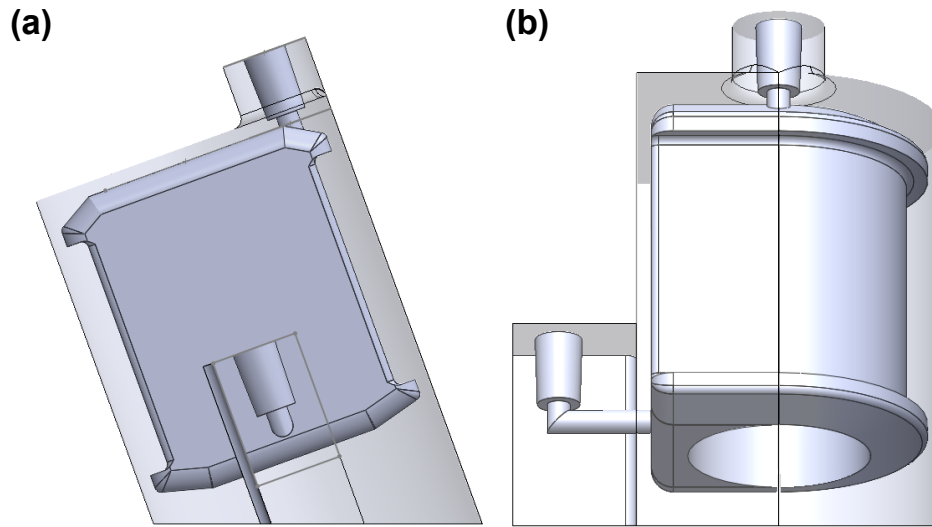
Resilient mount mold: (a) front view of the mold and (b) side view of the mold.
